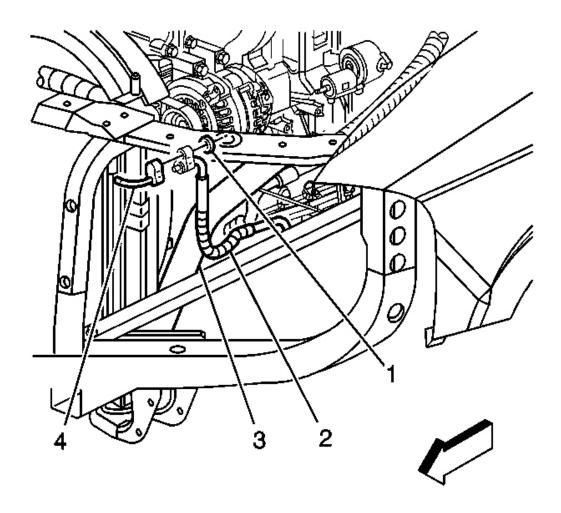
Removing/Installing Compressor Discharge Hose At Condenser Courtesy of GENERAL MOTORS CORP.
